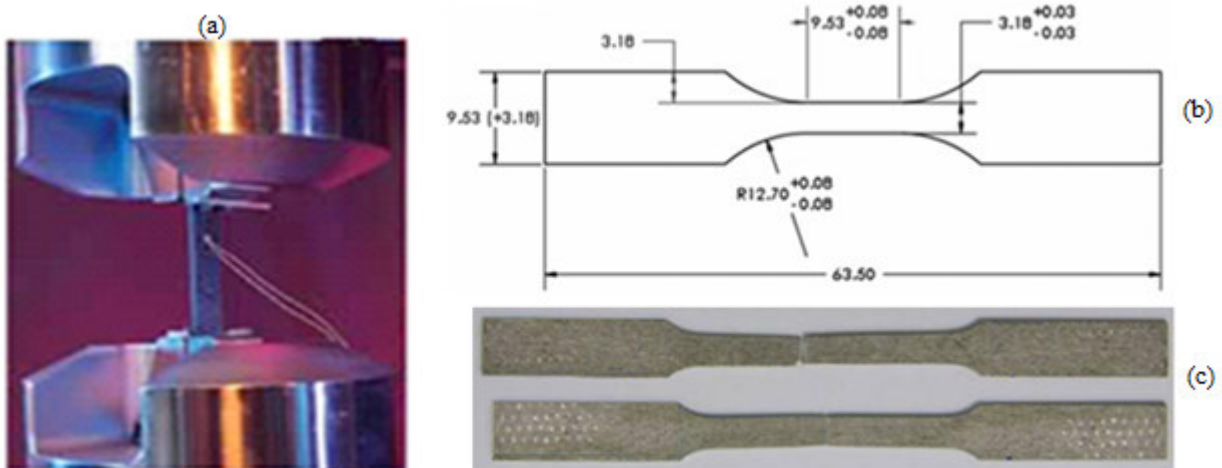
Testing of composites: (a) tensile testing, (b) dimensions (mm) of tensile specimen and (c) tensile specimens.
